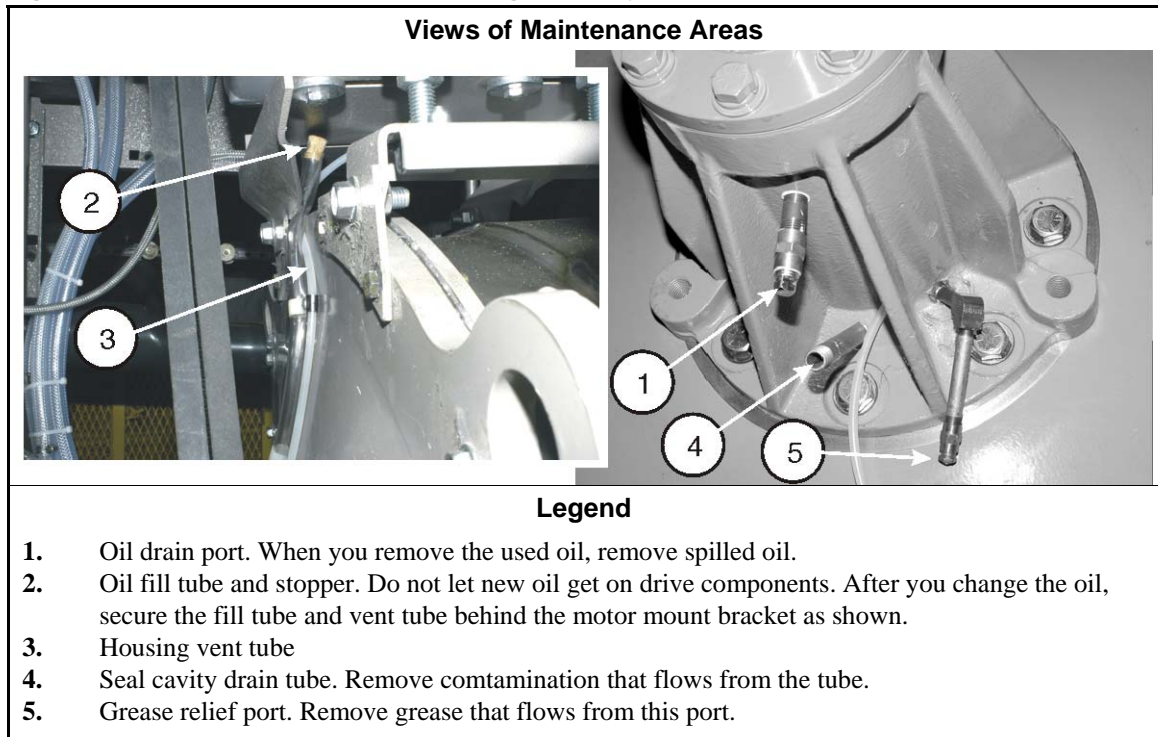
Grease Ports for Oil-filled Bearing Assembly with Seal Grease Maintenance. See also Figure 14.
